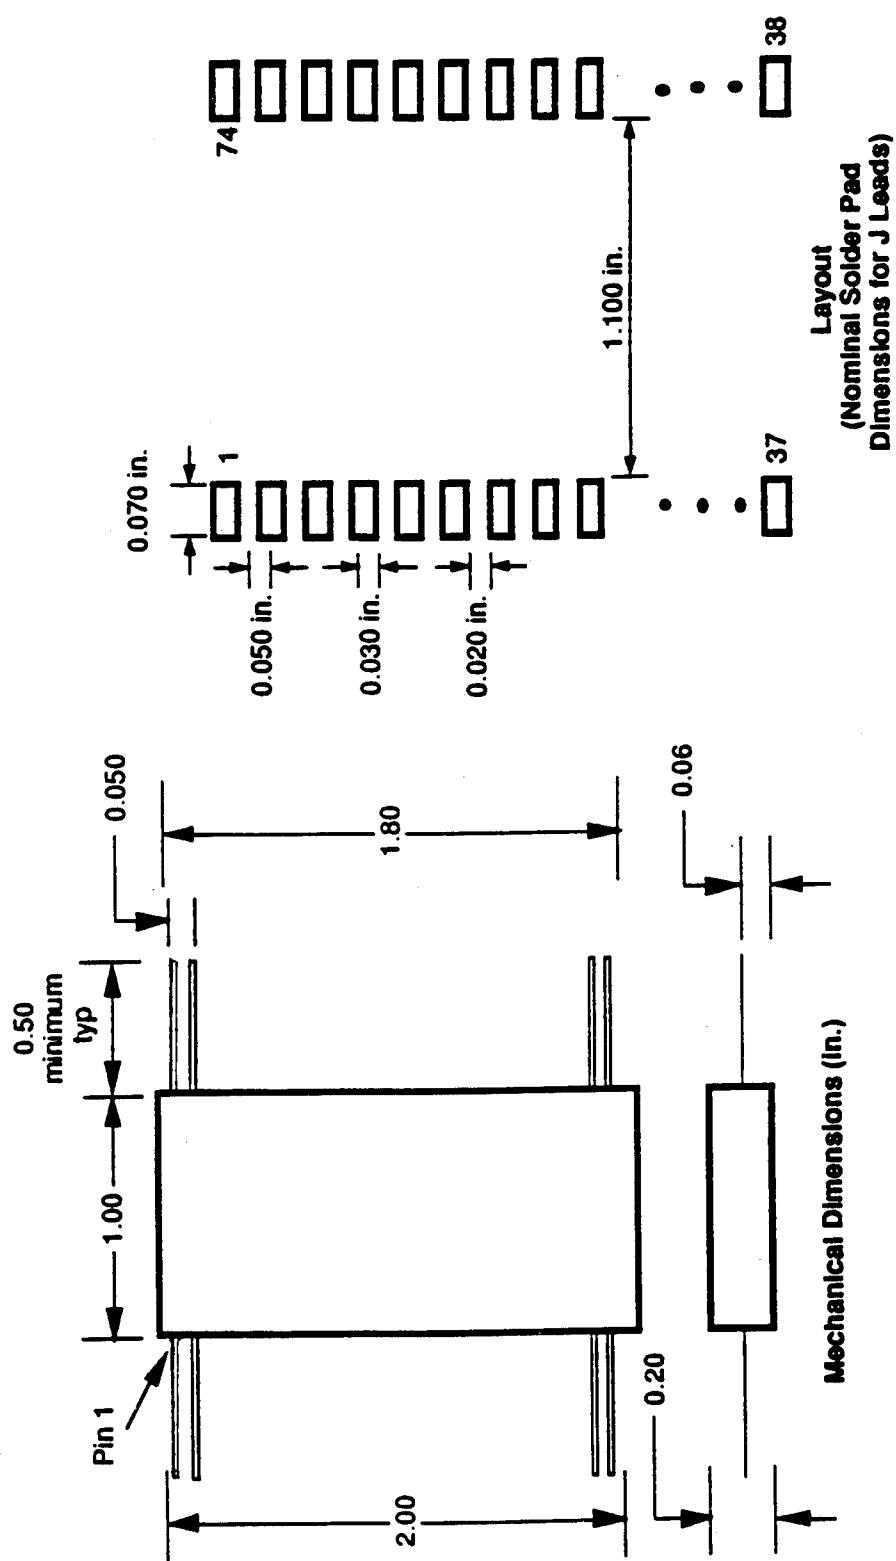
Package Dimensions and Printed Circuit Board Mounting Pad Layout
